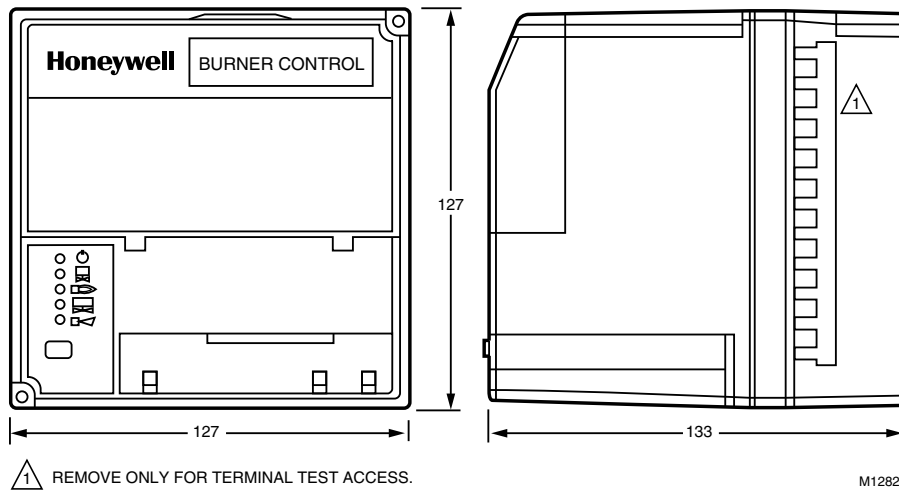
Mounting dimensions of relay module and wiring subbase in millimeters only.
